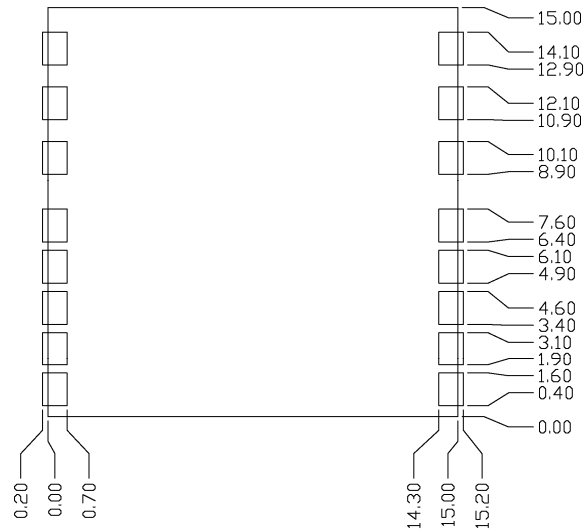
Recommended PCB Footprint (in mm) – Top View
